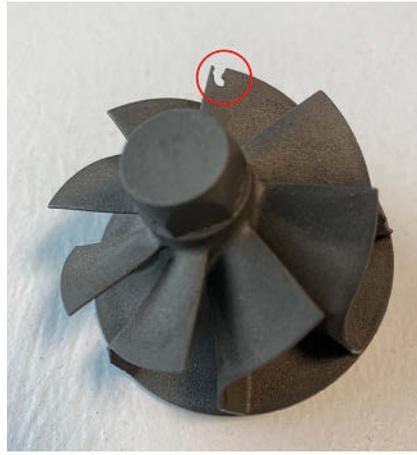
Typical casting defects with highly complex investment casting geometries due to early cooling of the shell.
